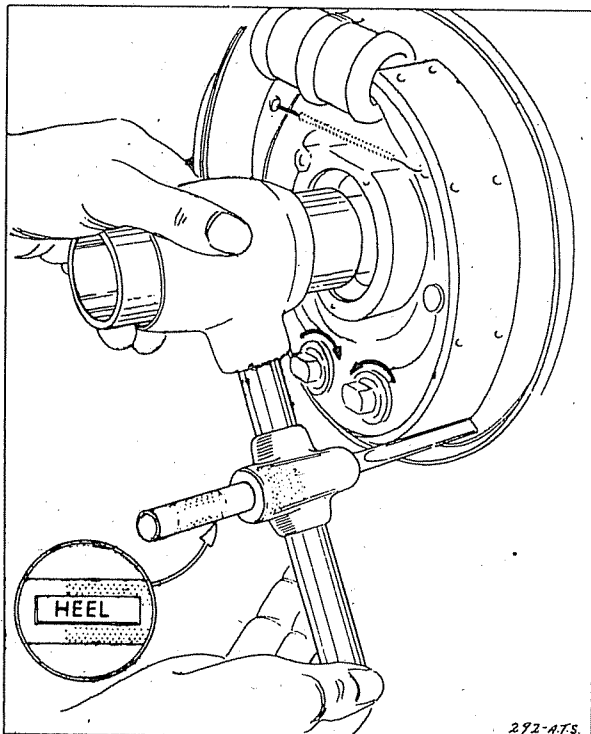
Checking Brake Shoe Heel Adjustment Tool MT-34-B.
